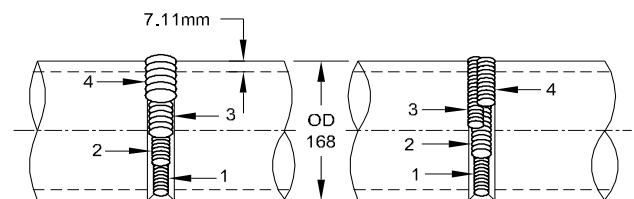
Welding Sequence in 5G Down Hill Position
